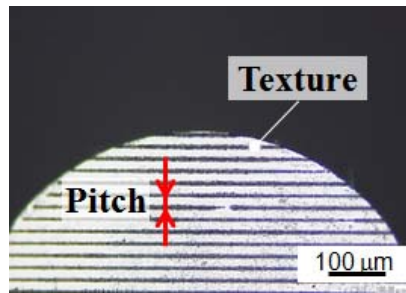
Edge of the cutting tools (Pitch = 20 μm)
